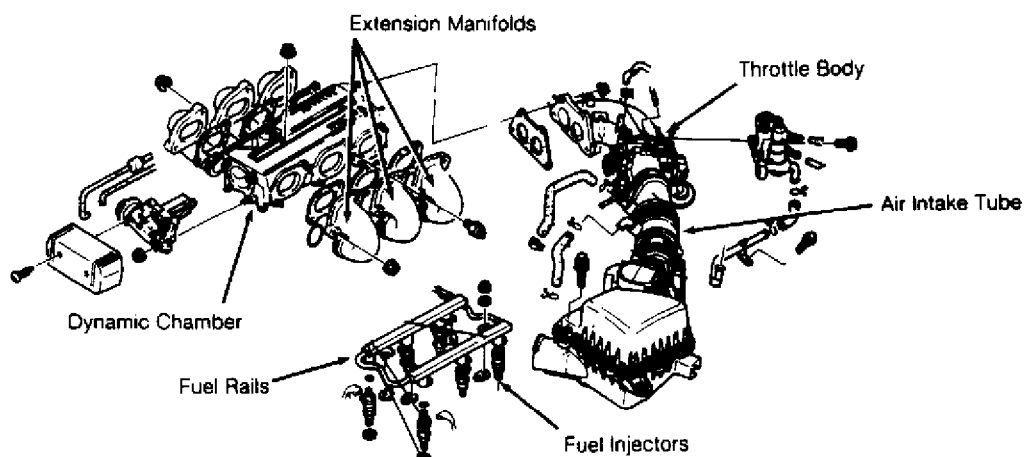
View Of Upper Intake Manifold Components & Fuel Rail (MPV 3.0L)
